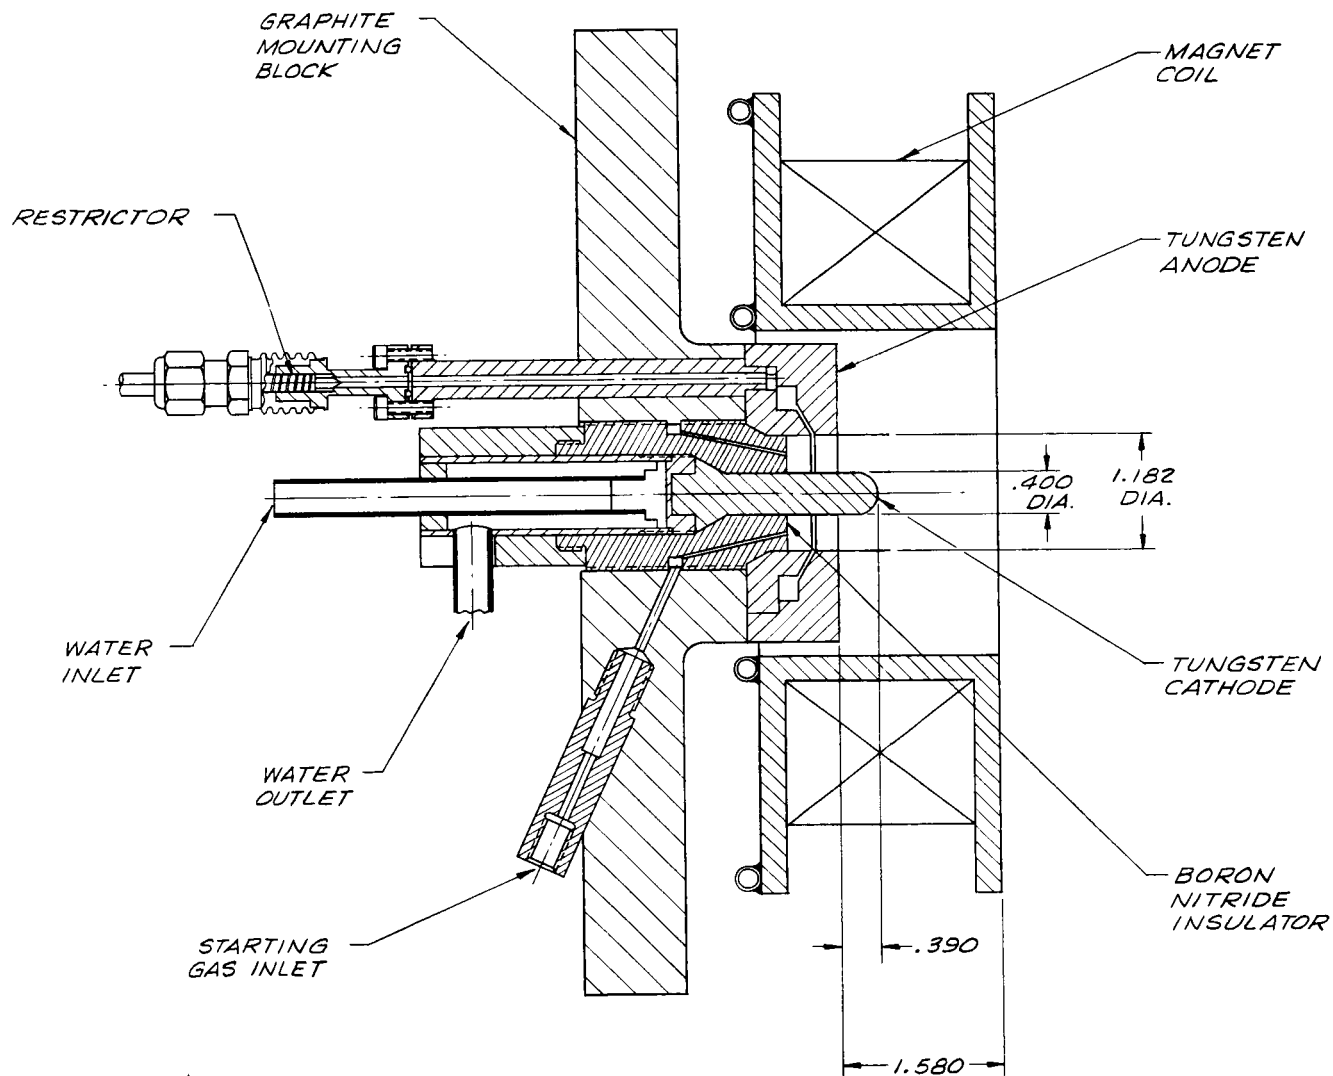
ENGINE CONFIGURATION USED IN SODIUM TESTS
